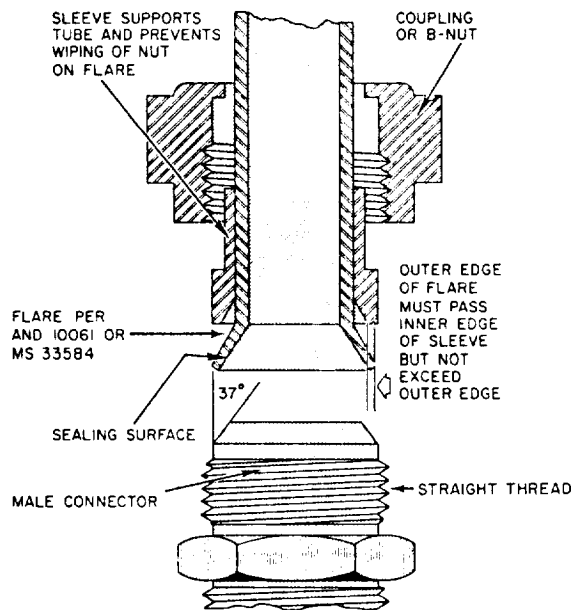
3-piece AN flared-tube fitting per AND 10056 or MS33656.
